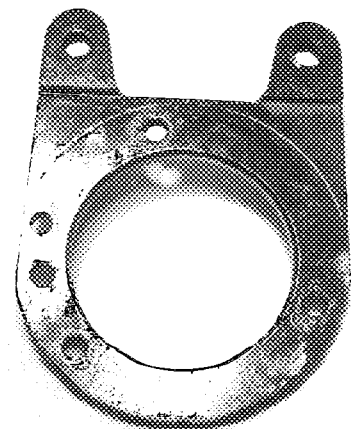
BRAKE CALIPER MOUNT TYPE 3
